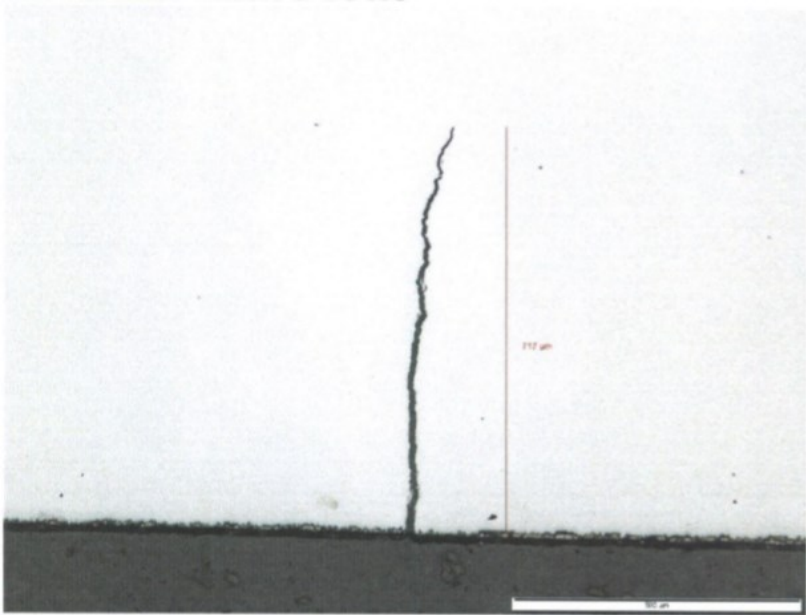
HIC test surface-crack Specimen 1, section No. 3 (Courtesy Voestalpine Tubulars)
